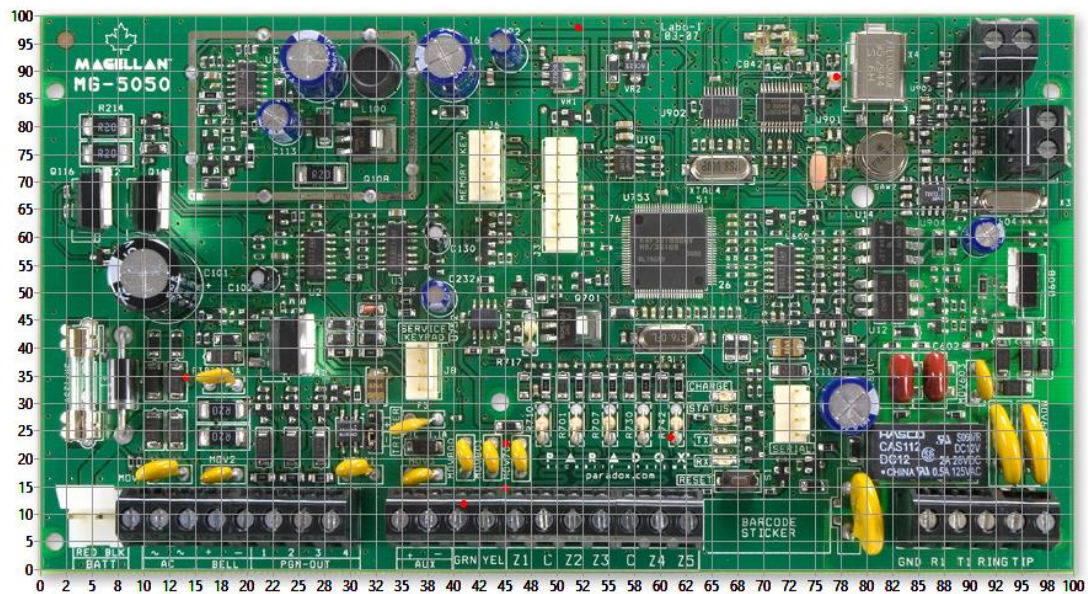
PRINTED IMAGE OF PCB WITH THE TEST POINTS
